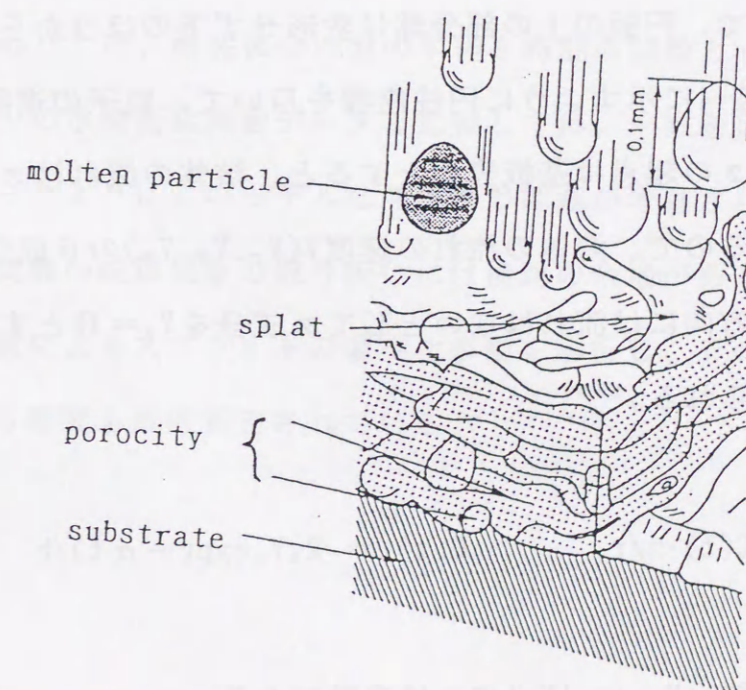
Schematic coating mechanism. ¹⁻⁷⁾
